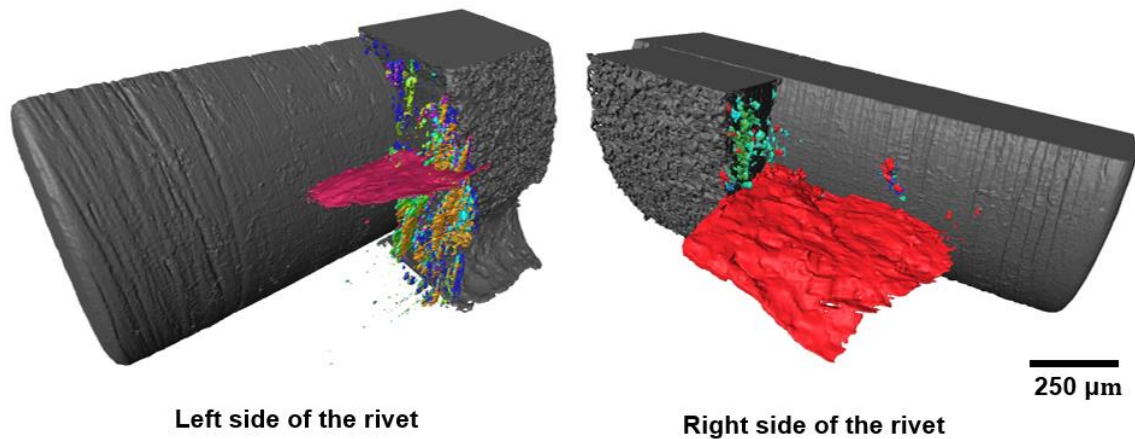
Type B specimen (a) Dominant crack 44 cycles before specimen failure on the left side of the rivet, (b) dominant crack 44 cycles before specimen failure on the right side of the rivet.
